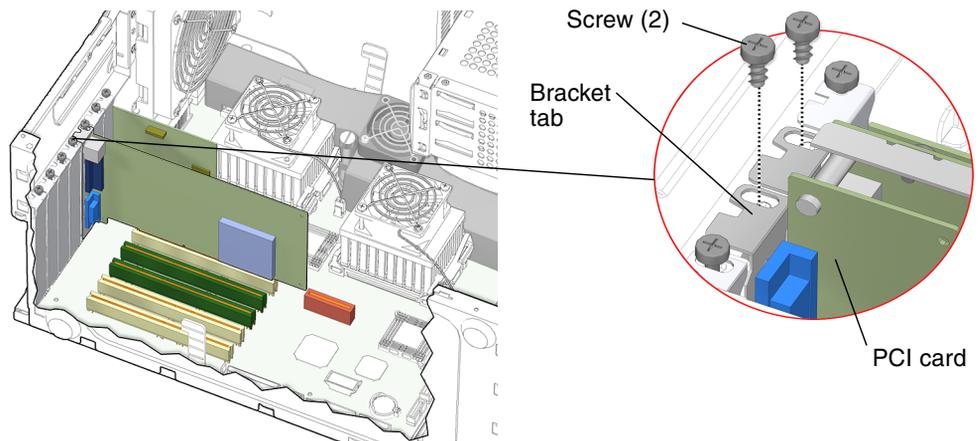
Removing the PCI Card Bracket Tab Screw
